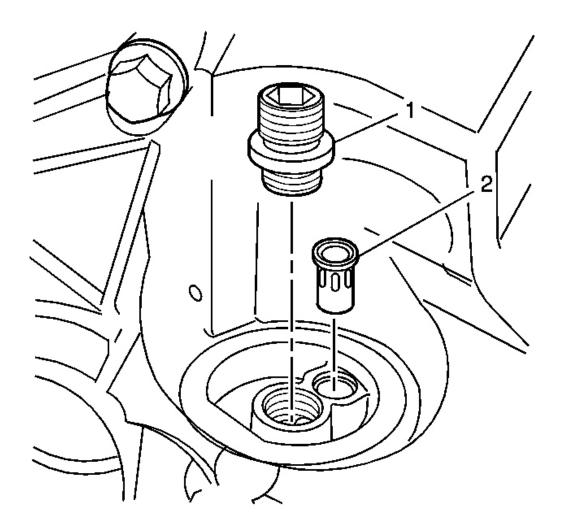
View Of Oil Filter Adapter & Bypass Valve Courtesy of GENERAL MOTORS CORP.
